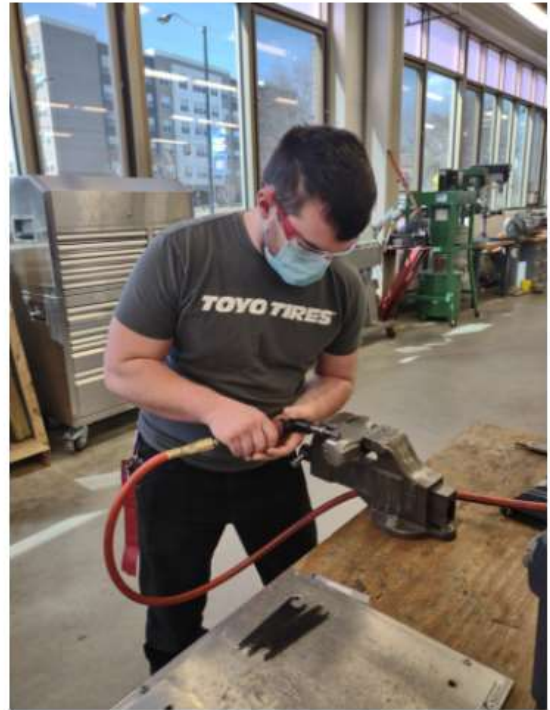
Justin Warlop using a Chicago Pneumatic tool with a double cut bur attachment
